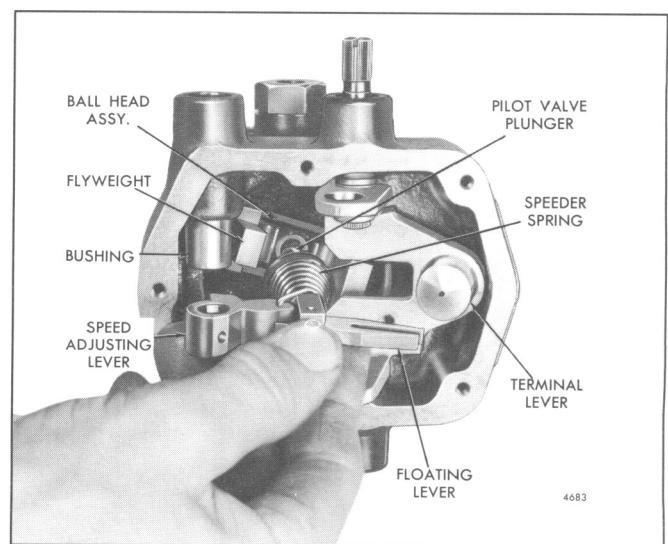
Installing Speed Adjusting Lever, Floating Lever, Speeder Spring and Pilot Valve Plunger Assembly
